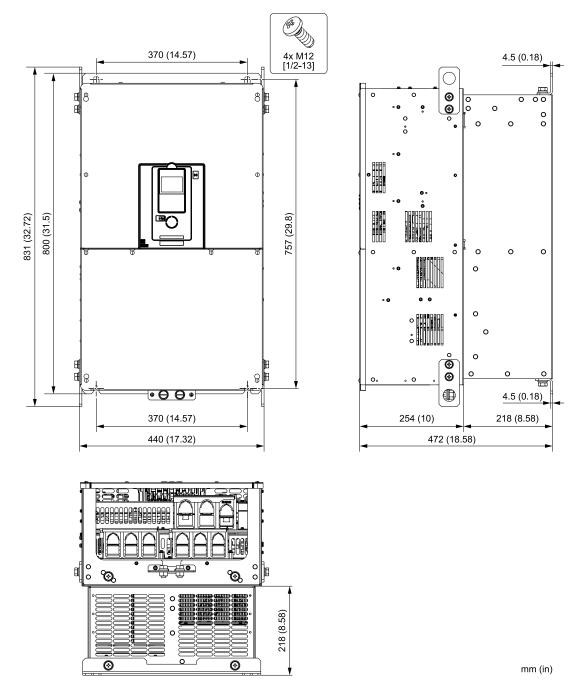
Exterior and Mounting Dimensions Diagram 2
